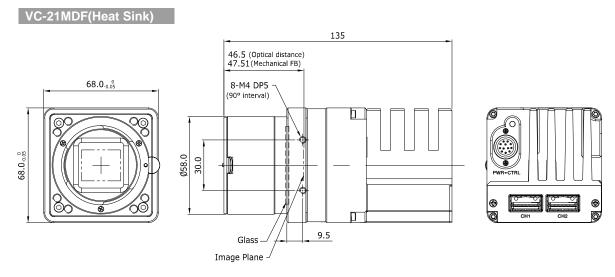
VC-21MDF-M/C460I-HS Mechanical Dimension
